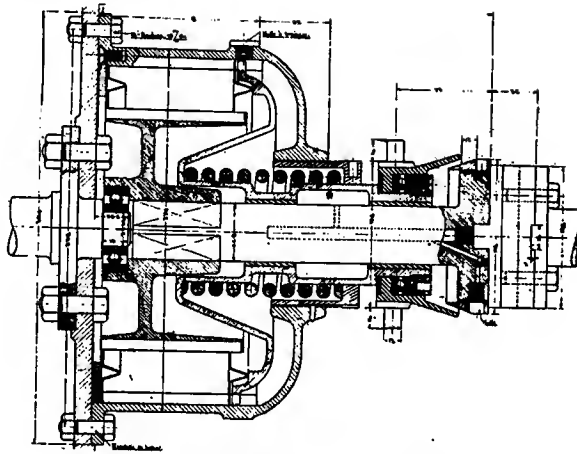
Sectional view of the new Hele-Shaw clutch.
